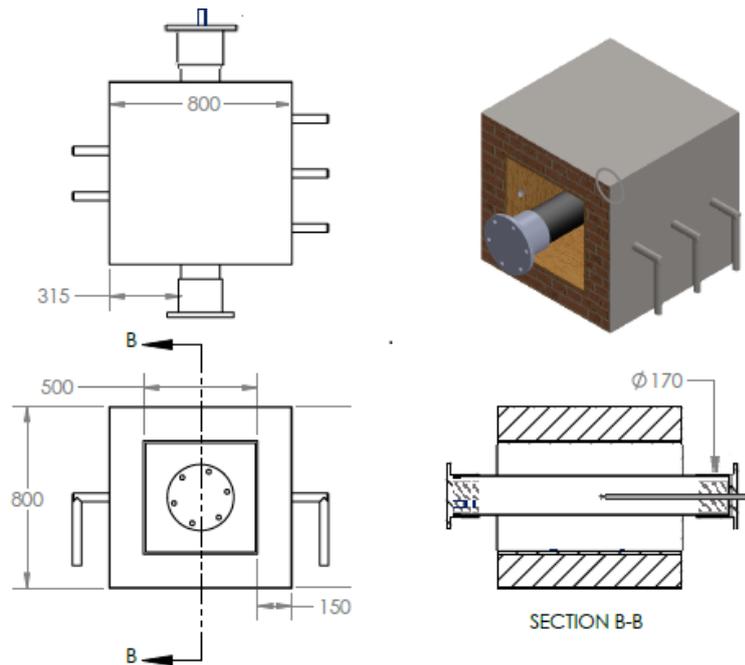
Technical drawing of the model pyrolysis furnace [22]
